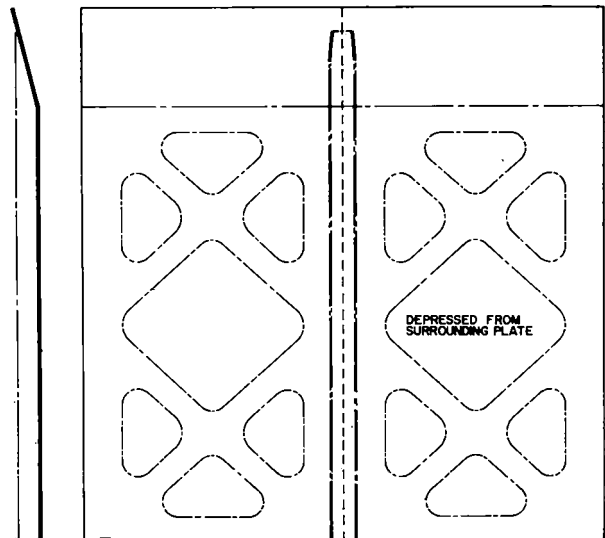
IMPROVED DESIGN OF PRESSING FOR 4mm SIDE WALL
